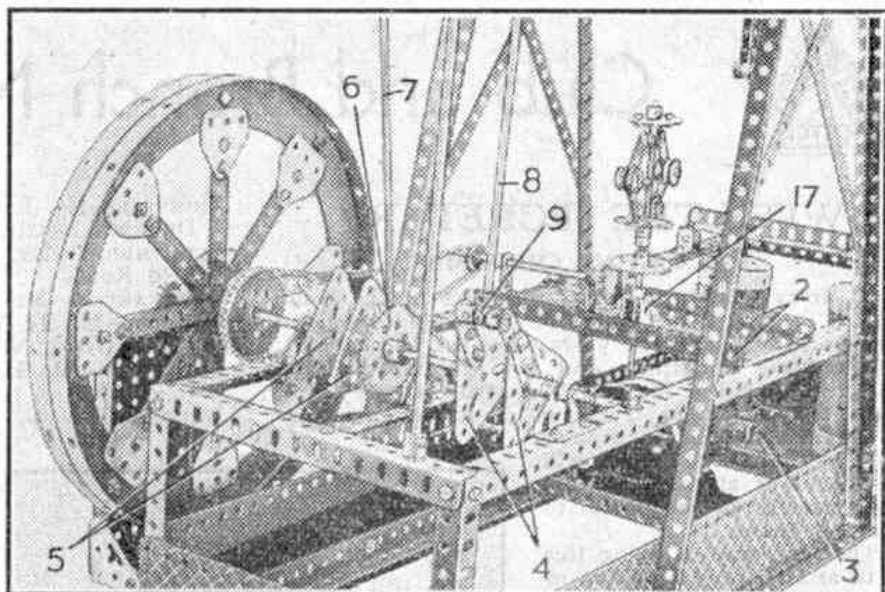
A close-up view of the Beam Engine showing details of the crankshaft and governor.
